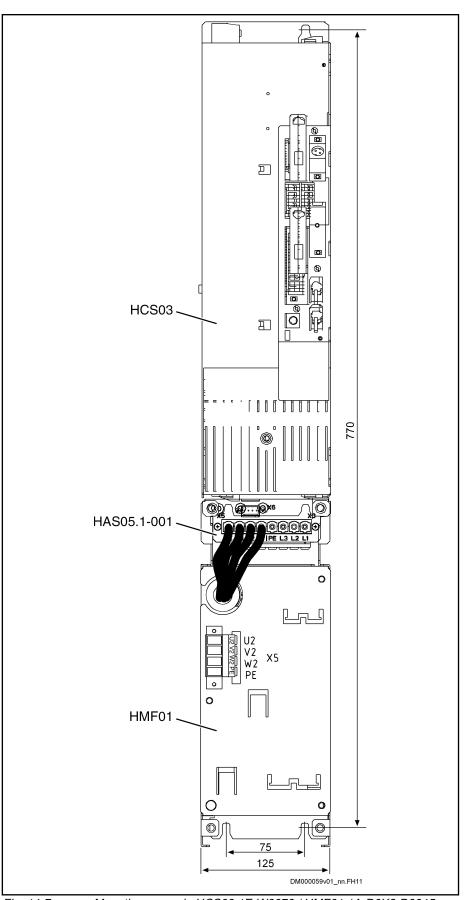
Mounting example HCS03.1E-W0070 / HMF01.1A-D0K2-D0045
